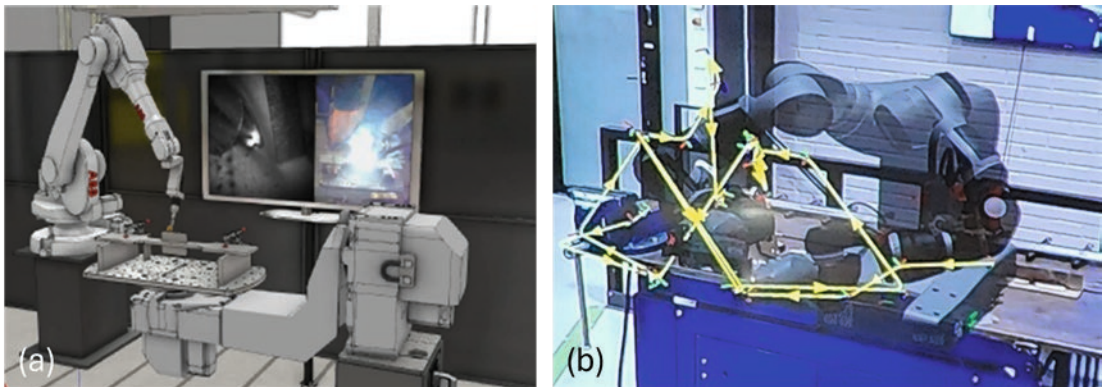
Extended reality applications in welding. (a) Welding camera and RGB camera feed in VR environment with digital representation of welding robot system, and (b) AR overlay showing robot and path plan.
